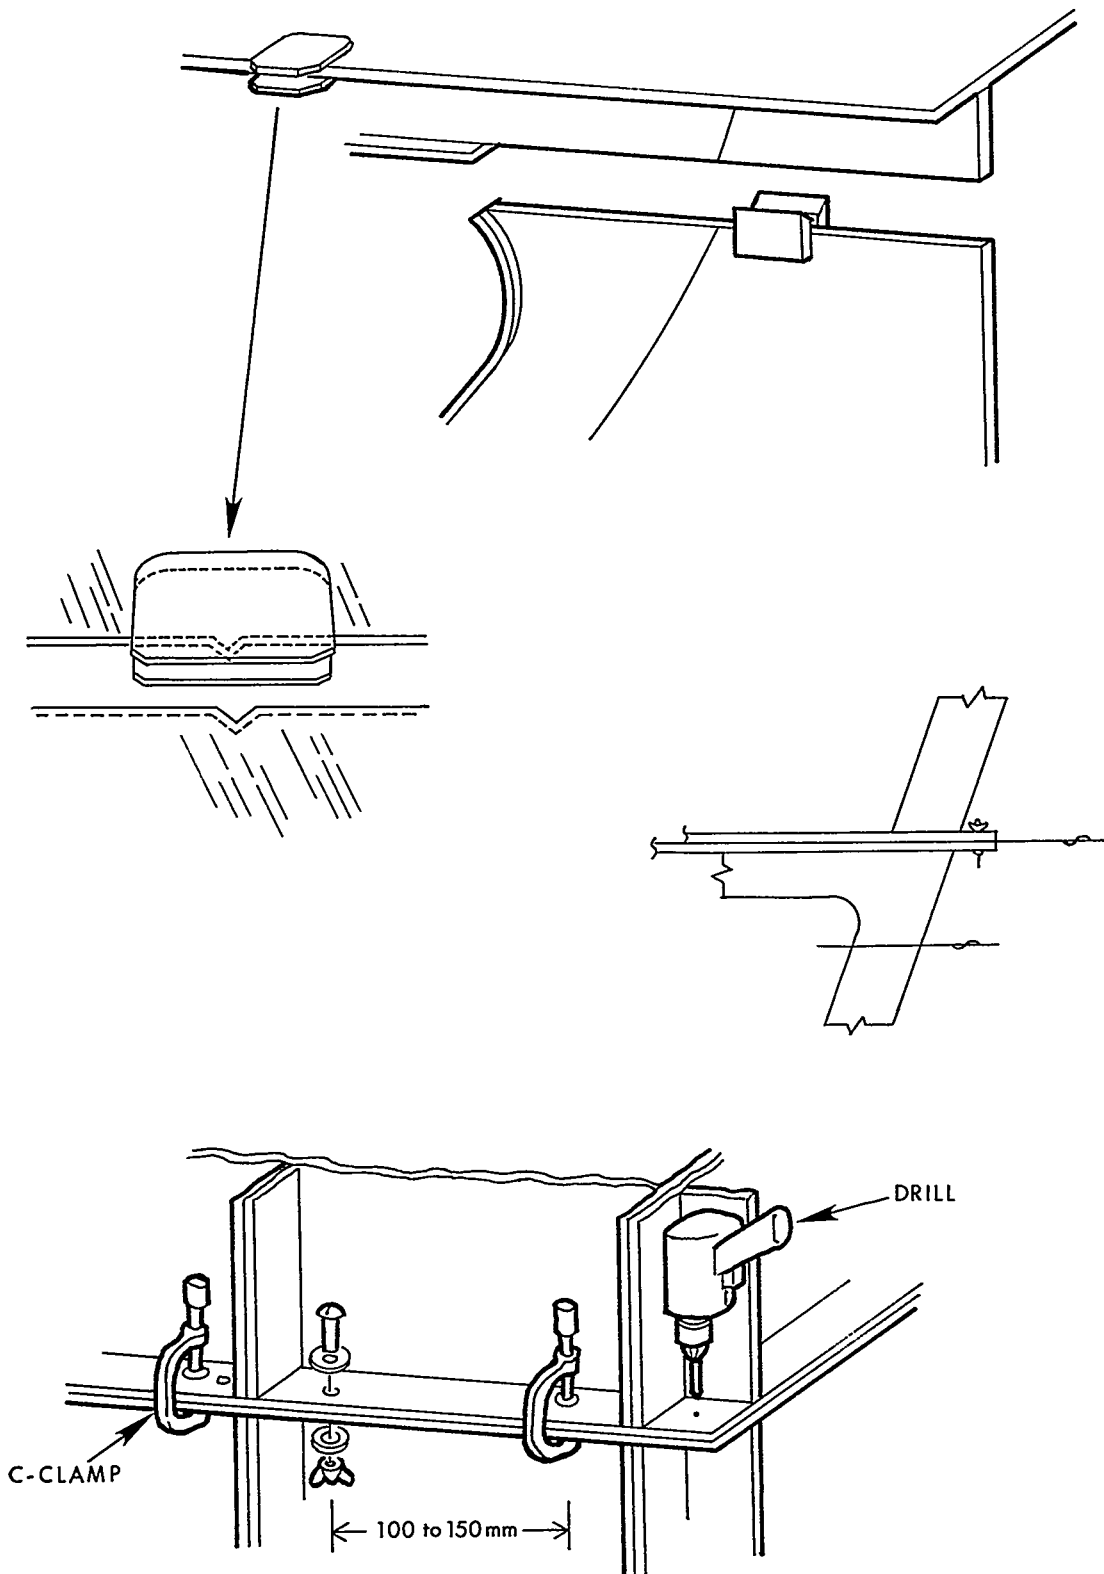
Connecting and Fastening Hull-model Sections. Bolt-hole diameters are 0.5 millimeter larger than bolt diameters.
